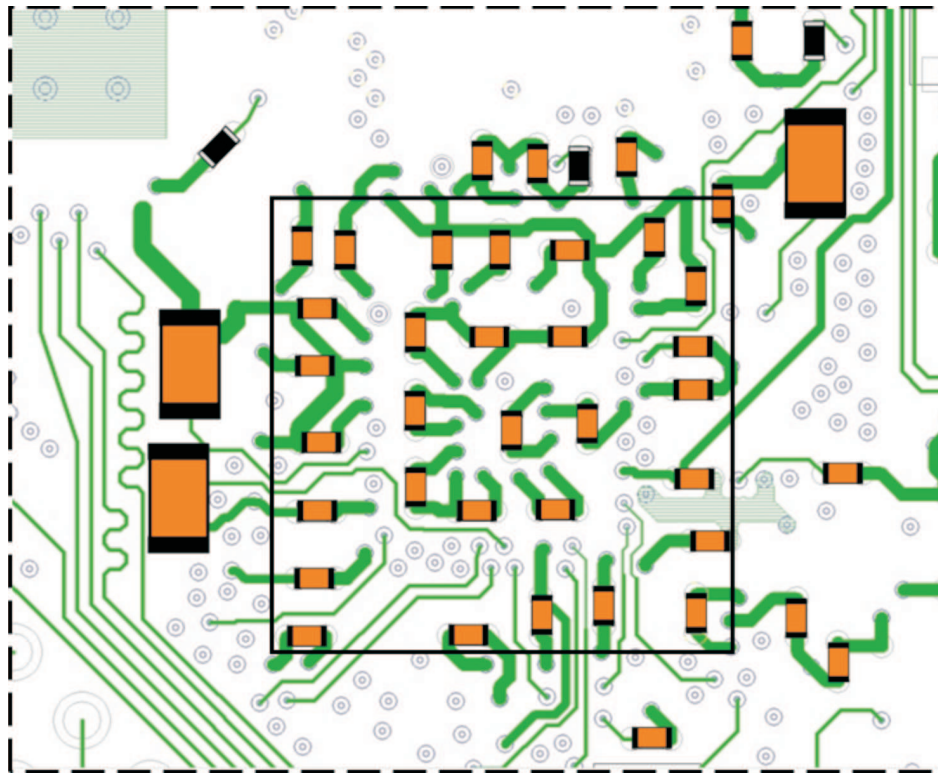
Close-Up of BeagleBoard Layer 6 - Bottom Side
